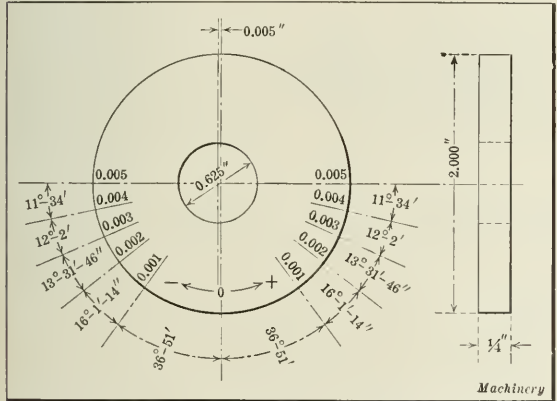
Enlarged View of Graduated Disk B shown in Fig. 7
